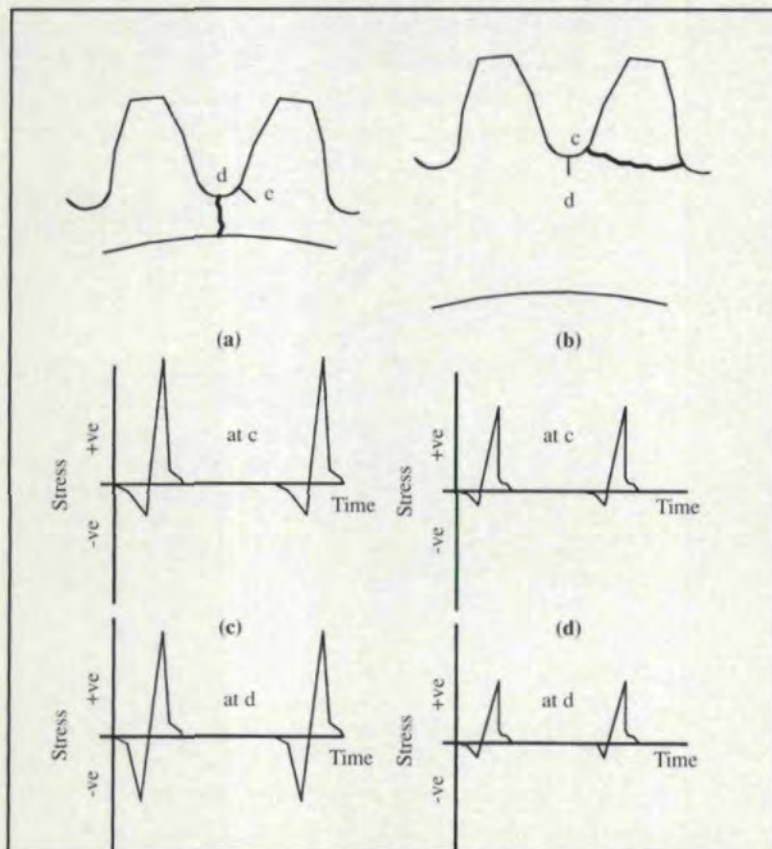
Failure due to bending stress for (a) thin-rimmed gears and (b) thick-rimmed gears. Tooth bending stresses for (c) thin-rimmed gears and (d) thick-rimmed gears.
